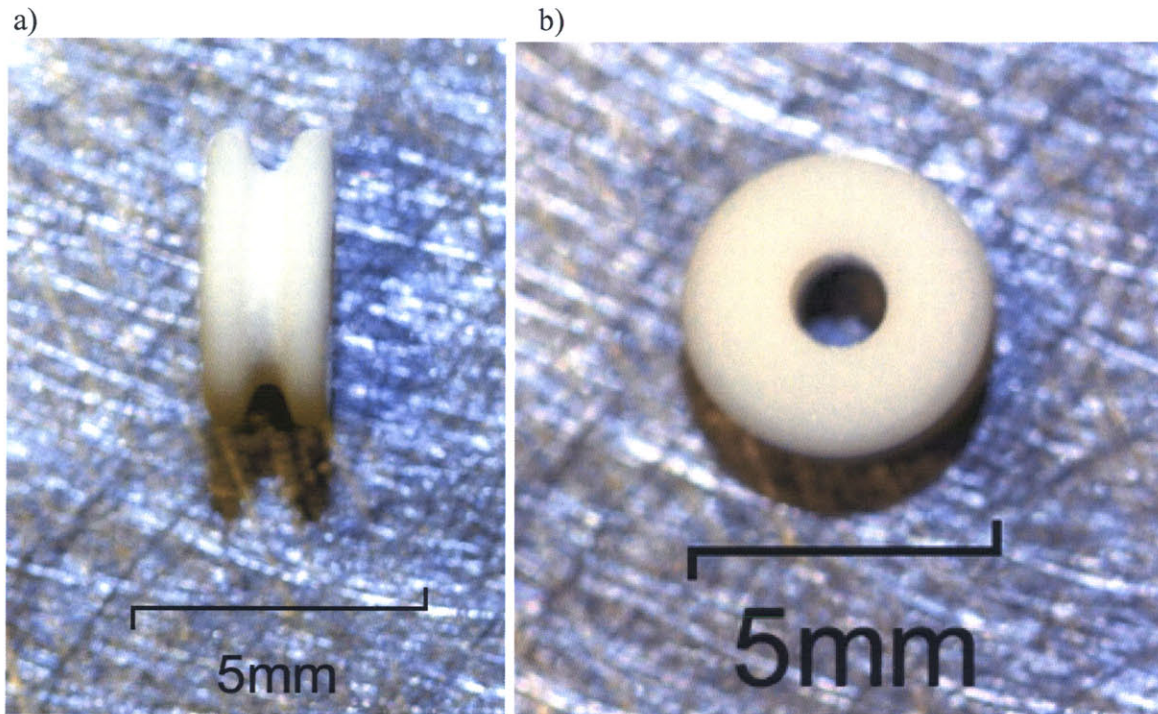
Ceramic pulley wheel, finished product: a) Frontal view; b) Side view.
